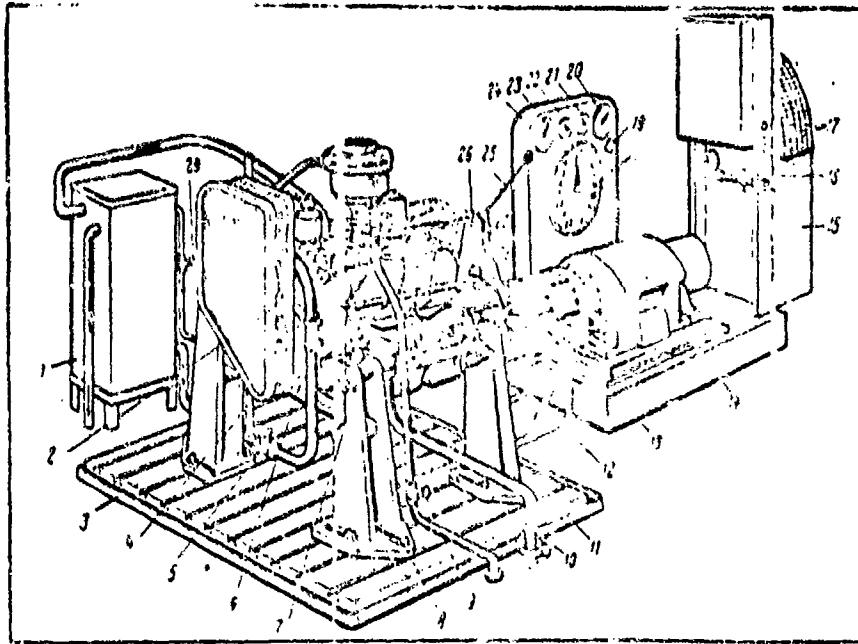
Stand for rolling and testing engines (ZIL-130 and ZIL-131):
